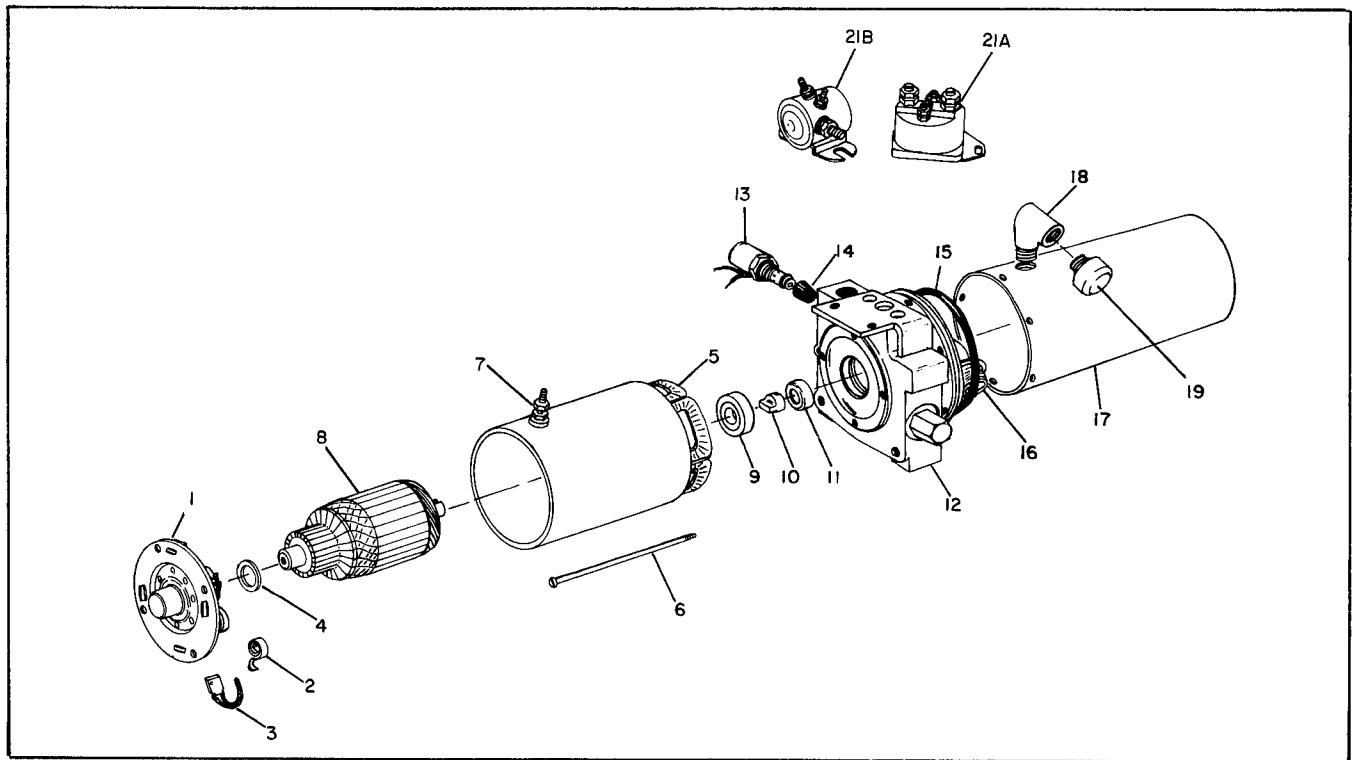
Pump-Motor-Reservoir Assembly. (Serial Numbers 81936 and Lower)
